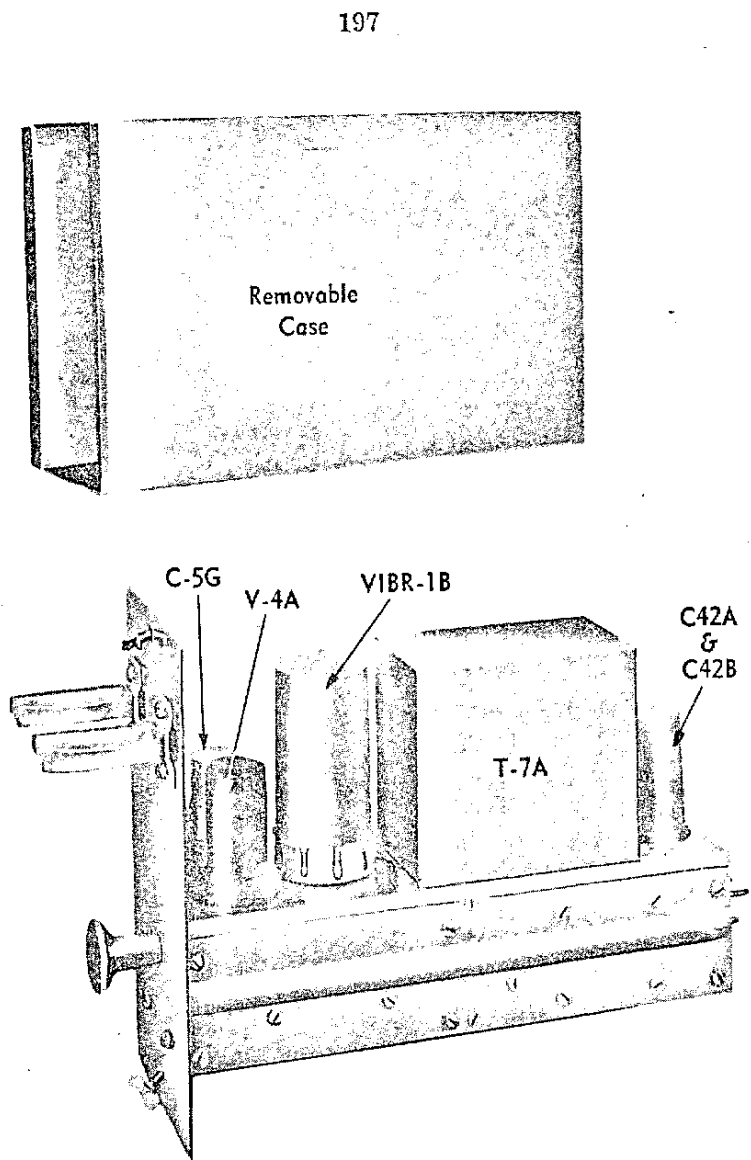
Receiver Supply Chassis—Top & Right Side View
